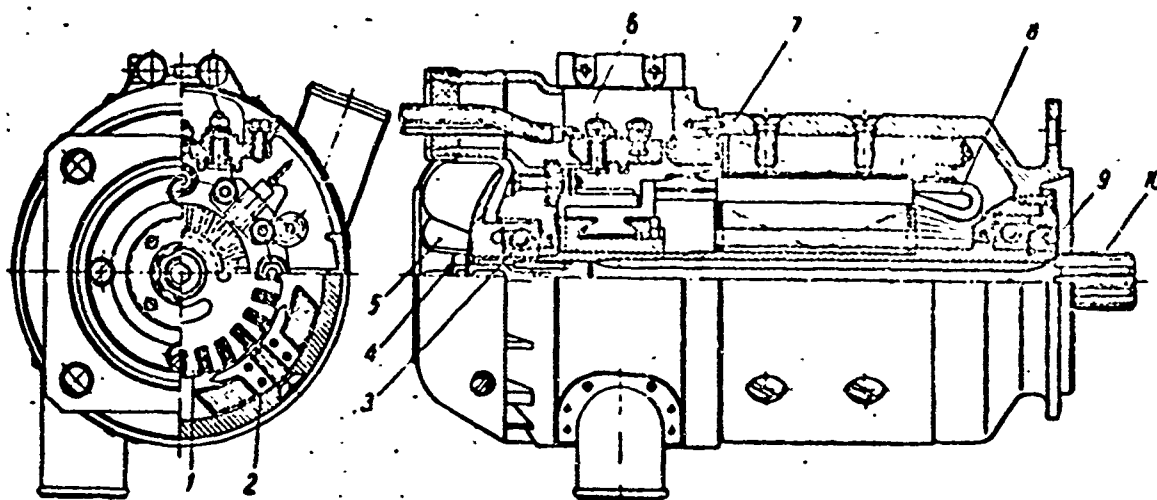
Construction of GSK-1500 M generator, no commutating poles. 1) Armature; 2) pole with winding; 3) bearing; 4) flexible-shaft mounting; 5) fan; 6) terminal box; 7) frame; 8) armature winding; 9) hollow shaft; 10) flexible shaft.
